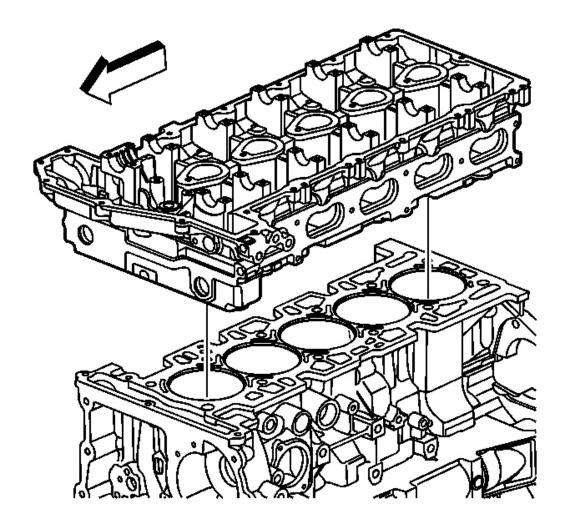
View Of Cylinder Head Courtesy of GENERAL MOTORS CORP.
